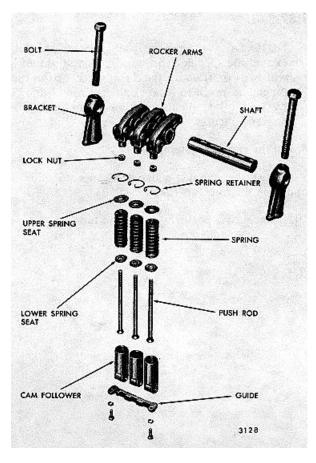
Valve and Injector Operating Mechanism and Relative Location of Parts
